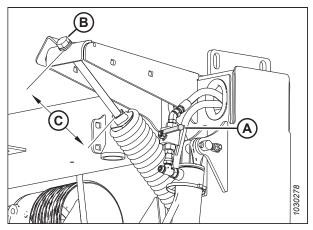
Lift Cylinder Lock-Out Valve and Adjuster Bolt
